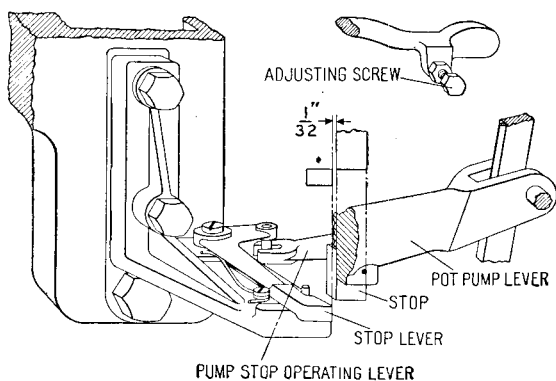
View of the pump stop mechanism showing the adjusting screws and the distance for adjustment on the device.
